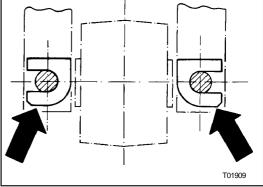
Camber adjustment spacers must be orientated so that the openings are horizontal and to the outside
